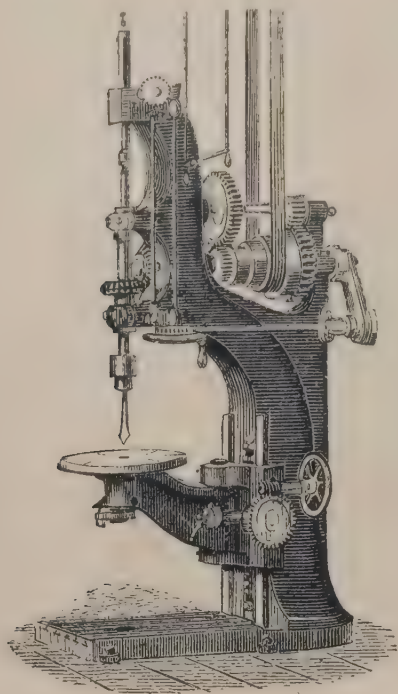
MUIR'S VERTICAL DOUBLE-GEARED DRILLING MACHINE.
